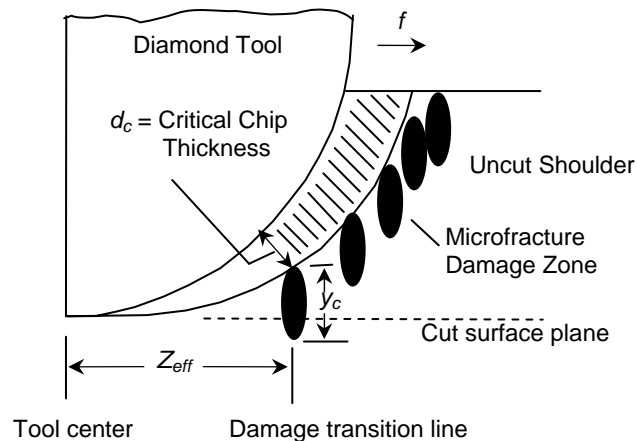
A projection of machining cut perpendicular to the cutting direction.
